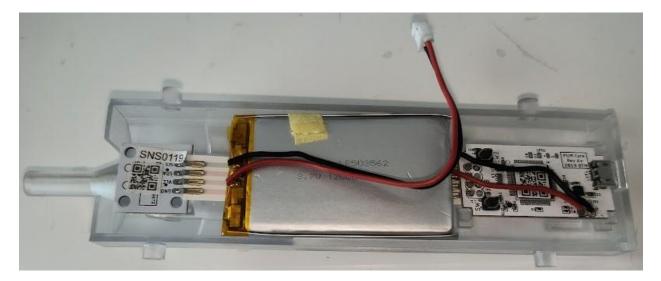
The electronics assembly and the 1200 mAh battery inside the electronics housing.
